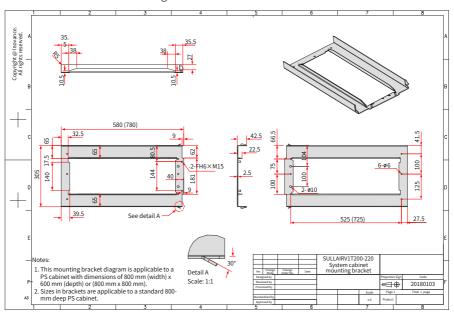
Dimensions of the mounting bracket for 200-220 kW models (standard configuration)
